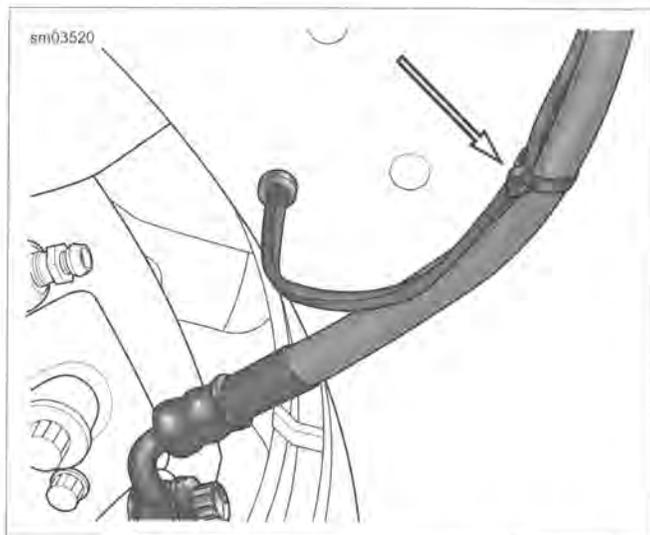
Capture Brake Hose and Front Fender Tip Lamp Wires
